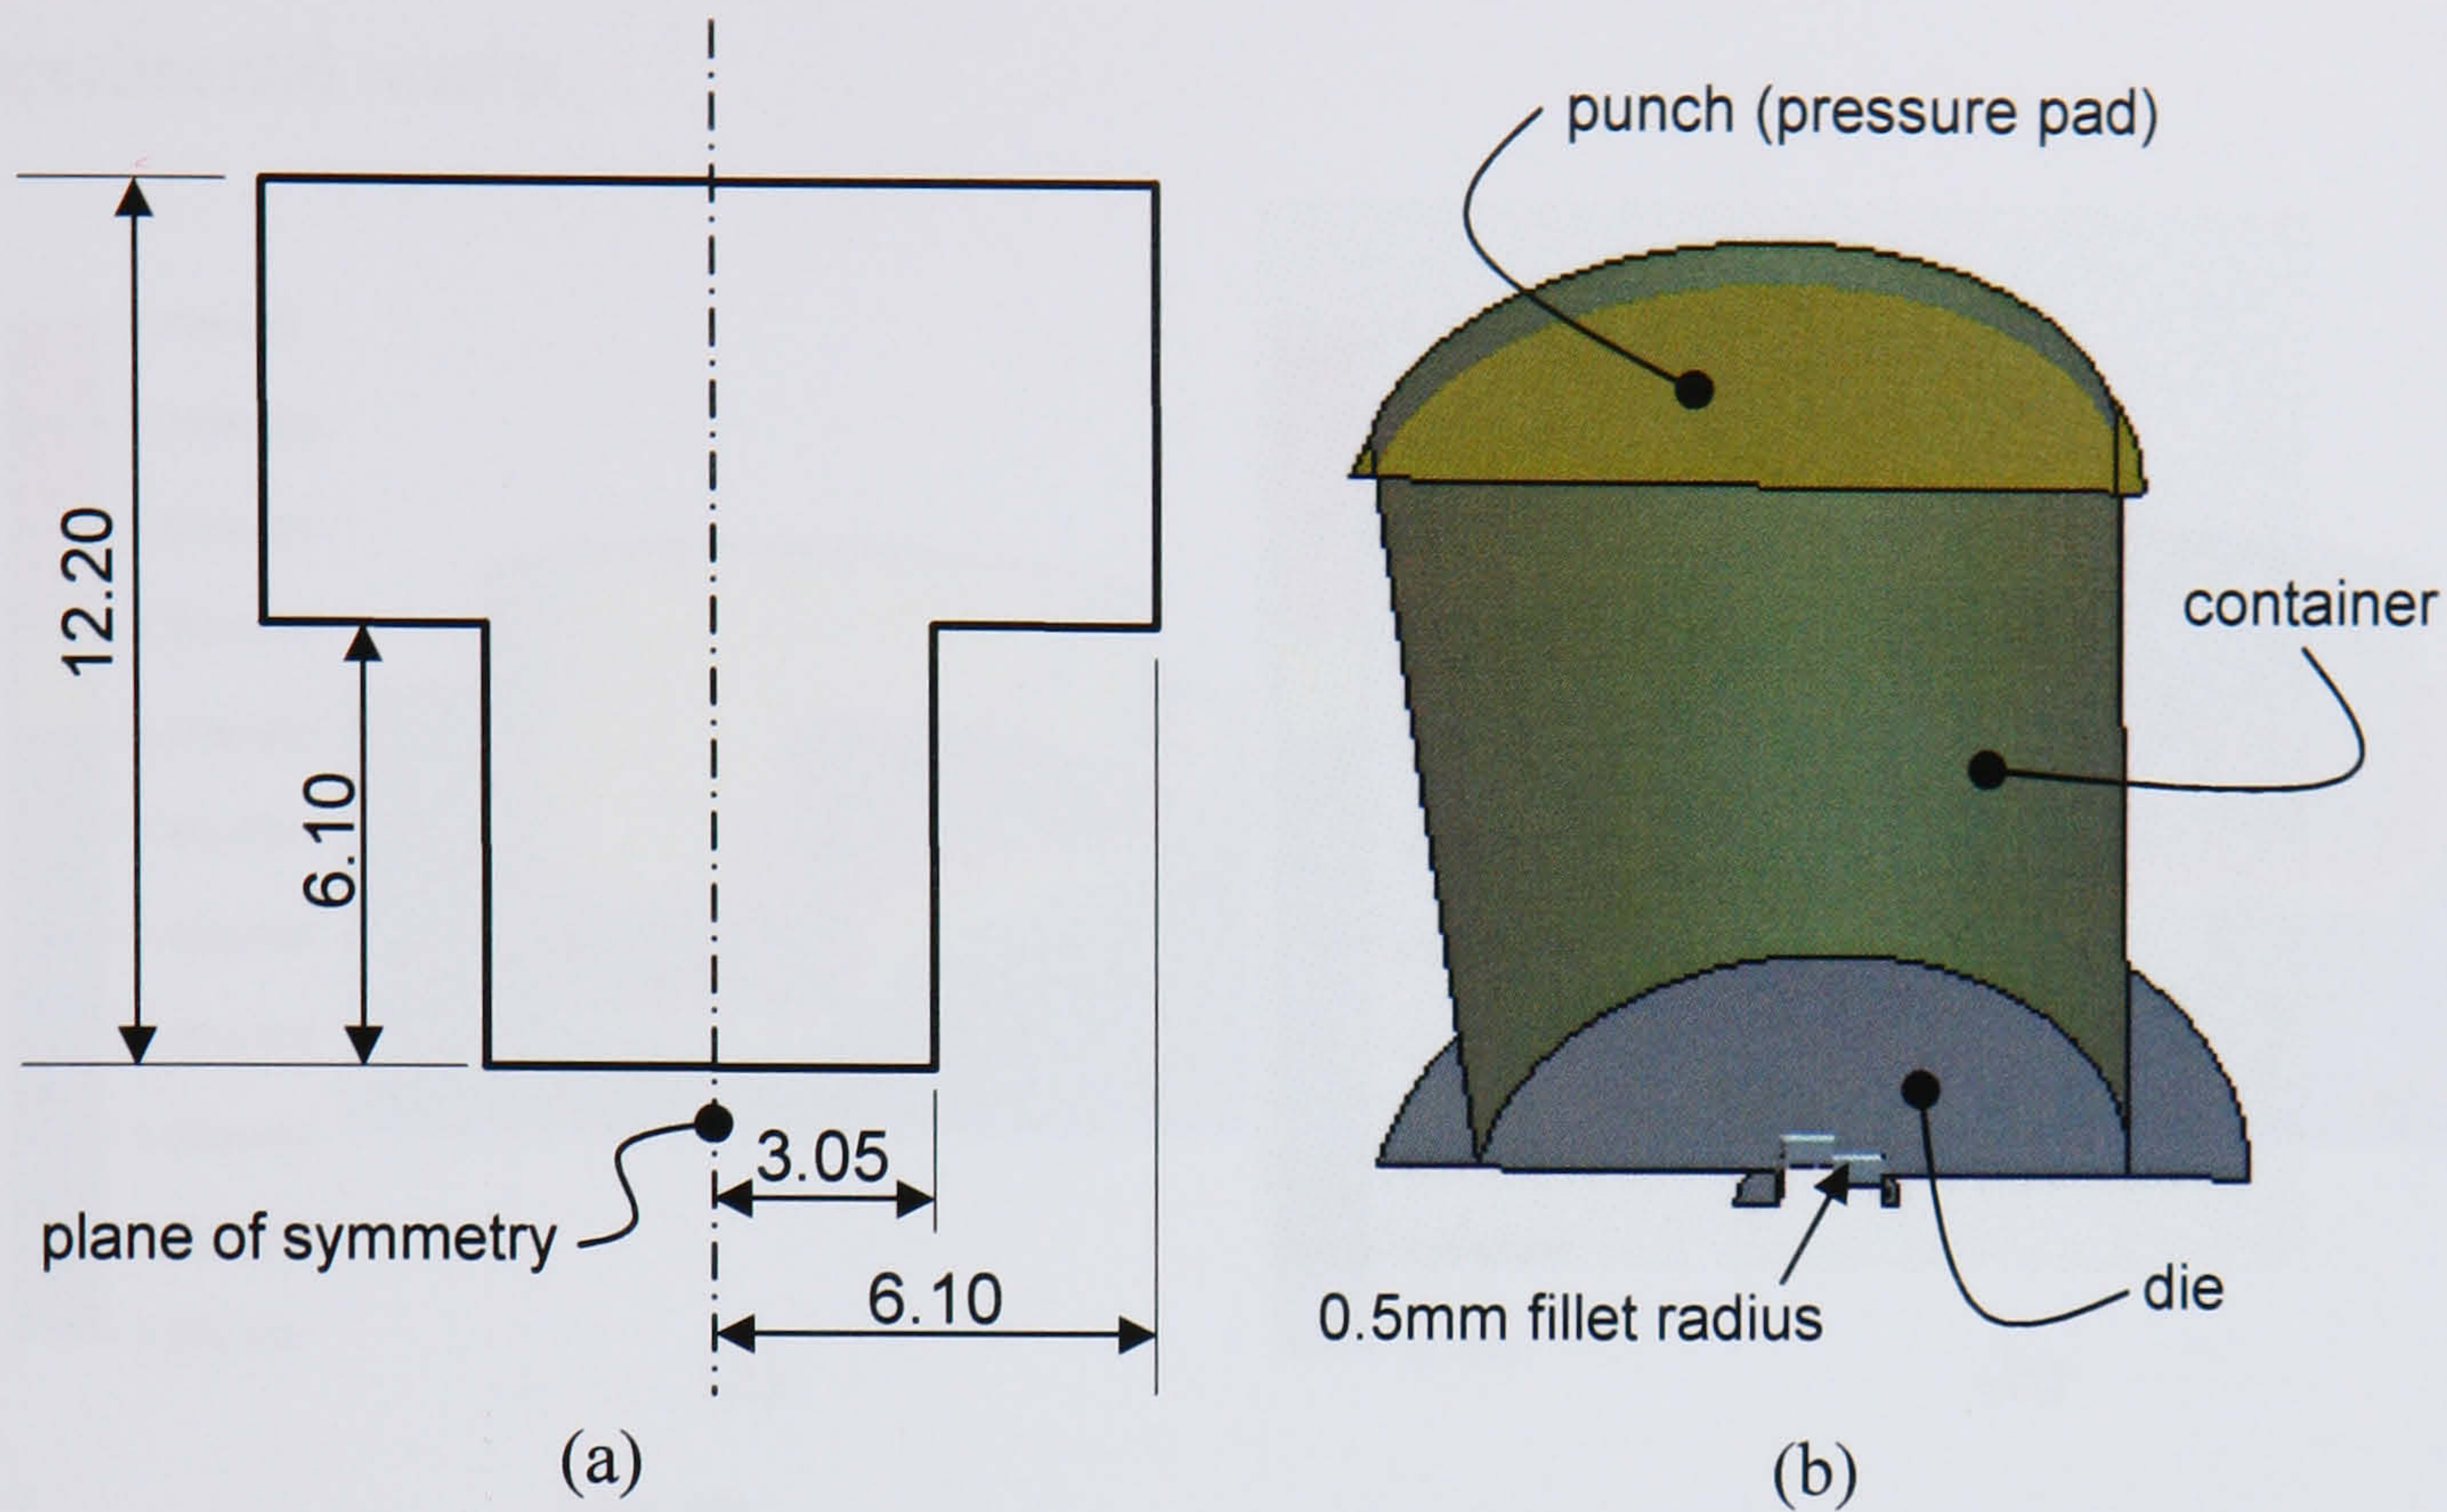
(a) Schematic drawing of the T-shaped die (all dimensions in mm) and (b) finite element model of the tooling
